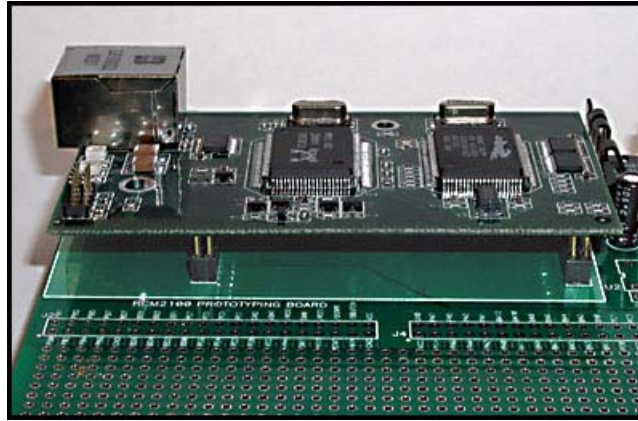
Installing the RCM2100 Module on the Prototyping Board.
